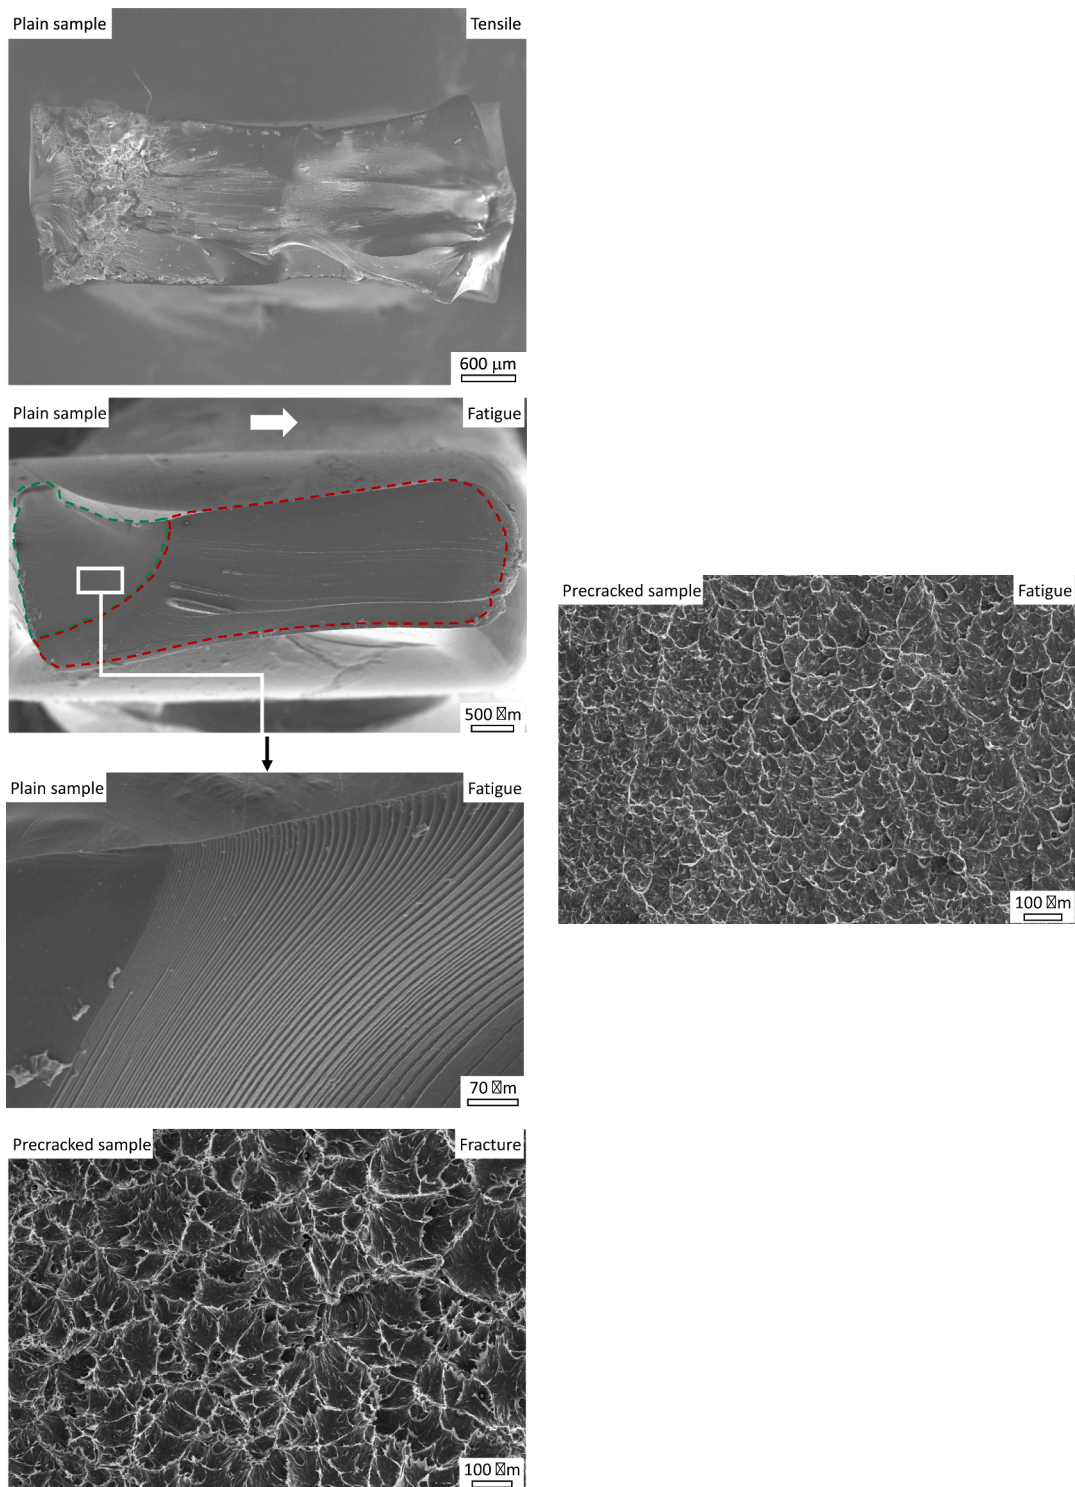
Fractography of IM PA-12: fracture surfaces obtained from plain samples employed for tensile and fatigue life (panoramic and detailed views) characterisations; fracture surfaces obtained from precracked samples used for fracture and fatigue crack growth characterisations.
